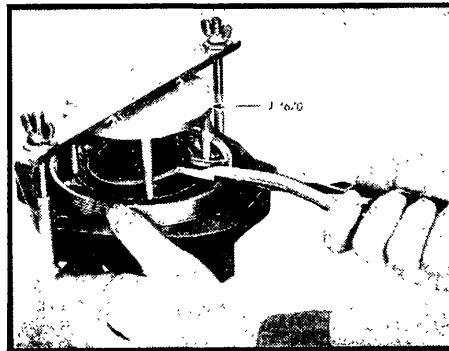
Special compressor tool for disassembling rear bearing retainer. 1951-52
